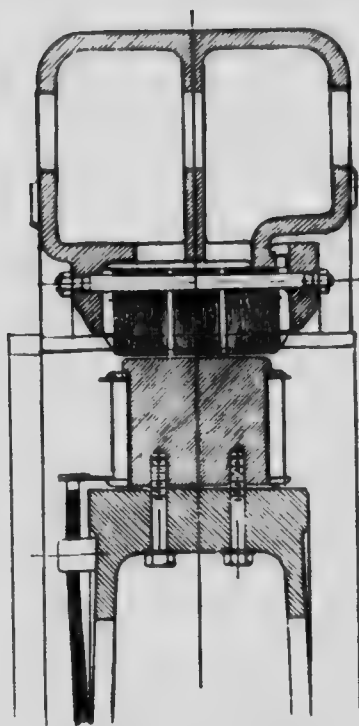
Section through Field Magnets of Brush 1,000-Kilowatt Alternator.
